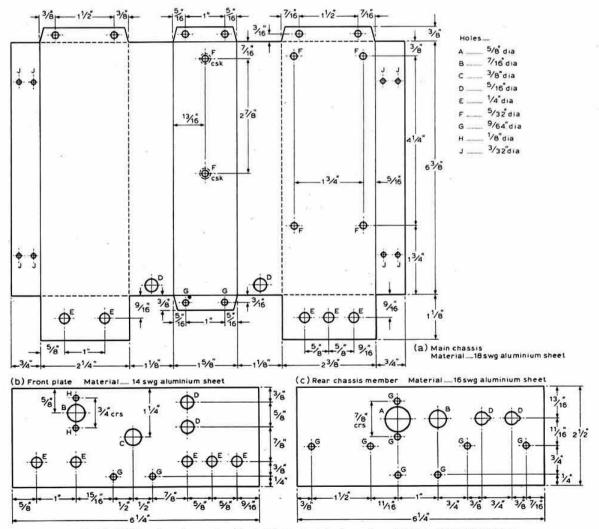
(a) Chassis main member blank. (b) Front plate dimensions. (c) Rear plate dimensions
